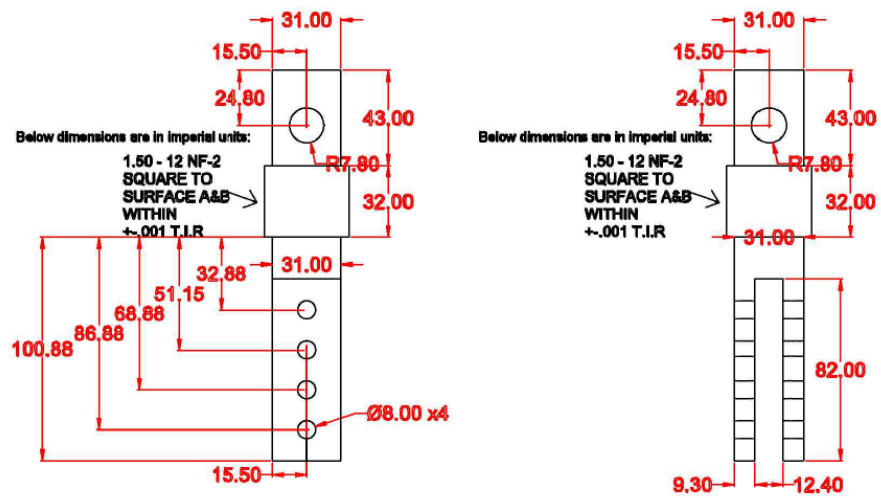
Adapter designed for the ram of the UTM tensile machine.
